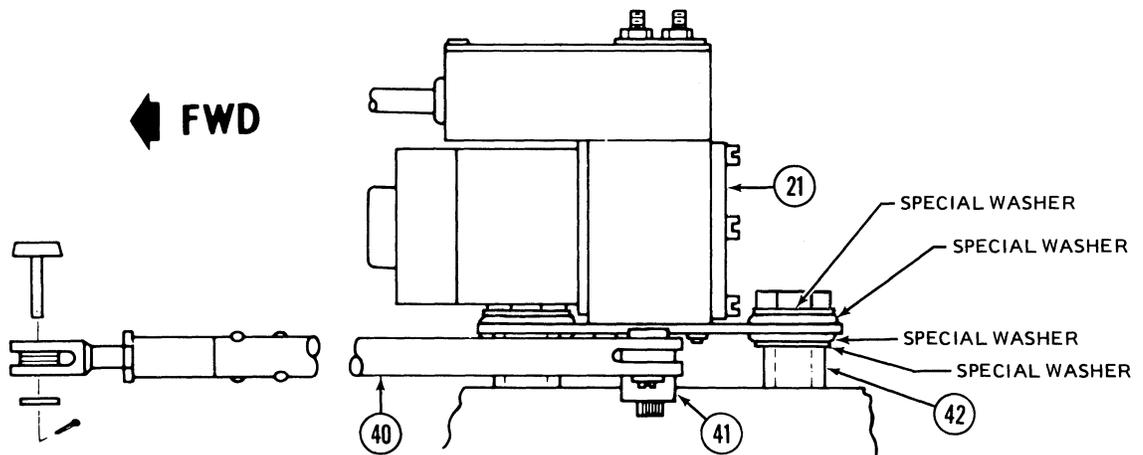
Engine Installation – Model 250-C18 (Sheet 2 of 4)
